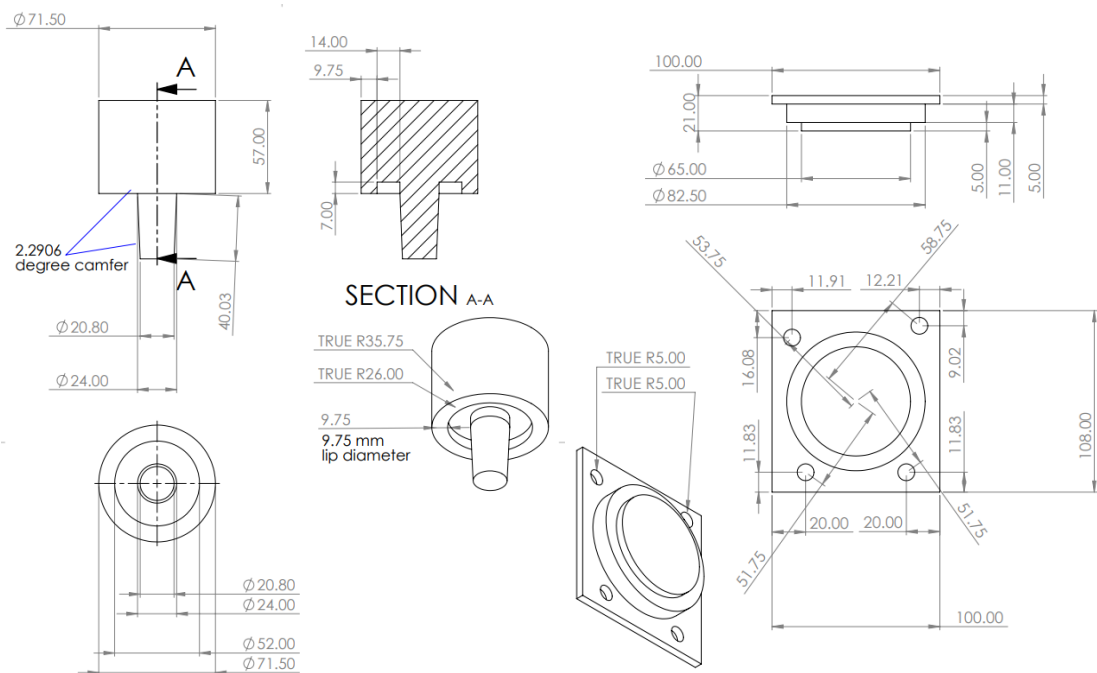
Acrylic plug for thermostat housing (a) and blanking plate for thermostat housing (b)
